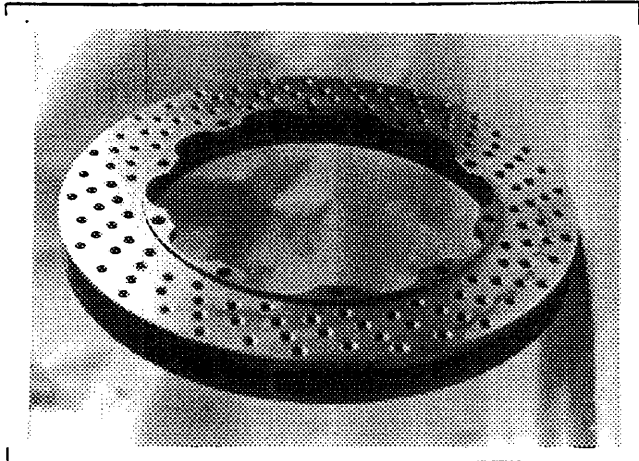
FRONT AND/OR REAR BRAKE DISC
